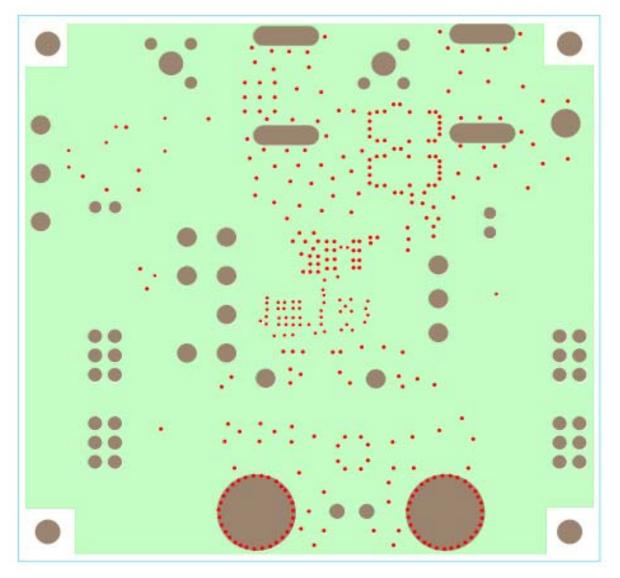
PCB - INNER LAYER 5 (TOP VIEW)
